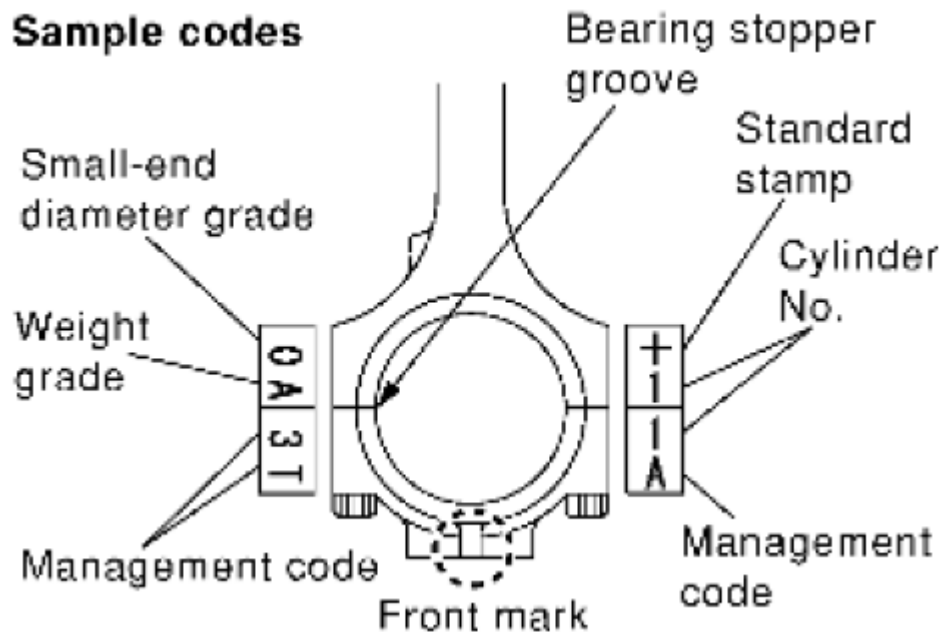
Matching Stamped Cylinder Number Marks On Connecting Rod
